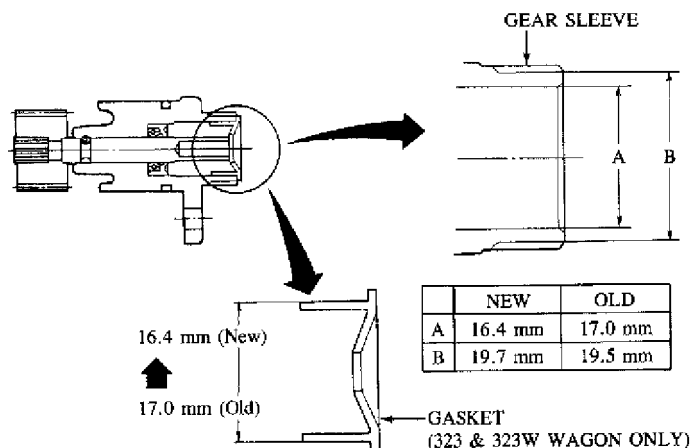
Speedometer Gear Sleeve & Gasket Modifications
